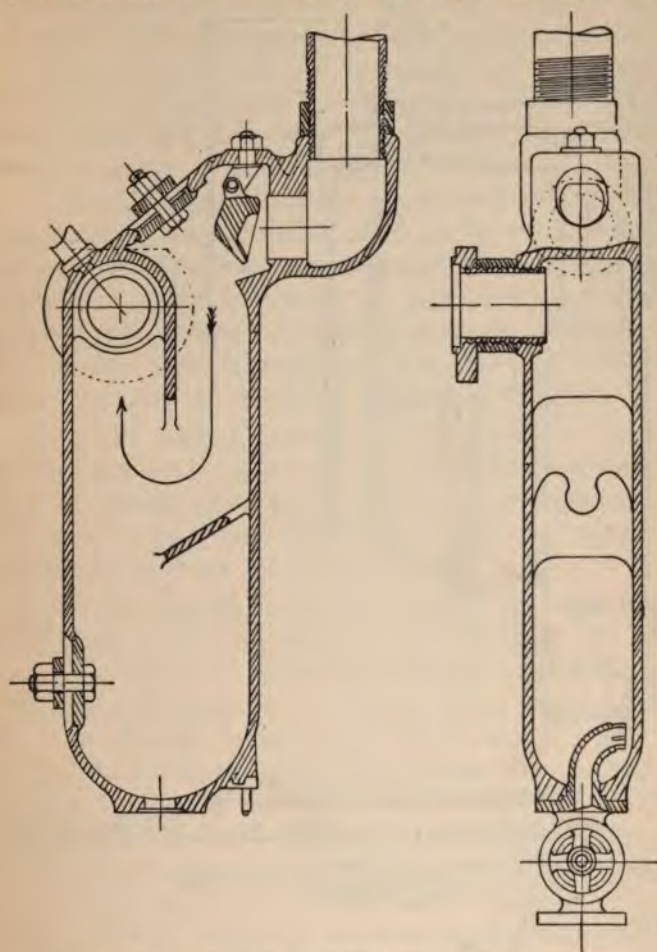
BELLEVILLE BOILER SEDIMENT CHAMBER.
